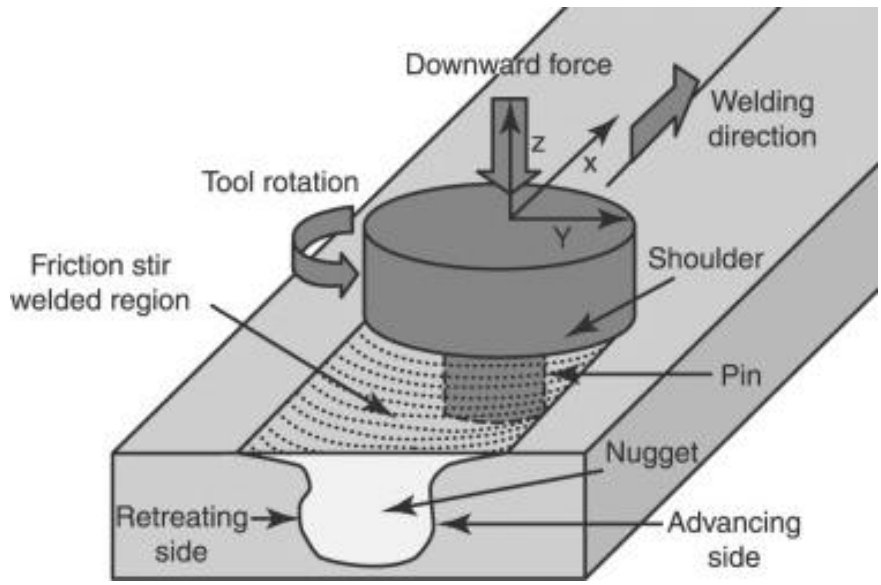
Schematic diagram of friction stir welding
